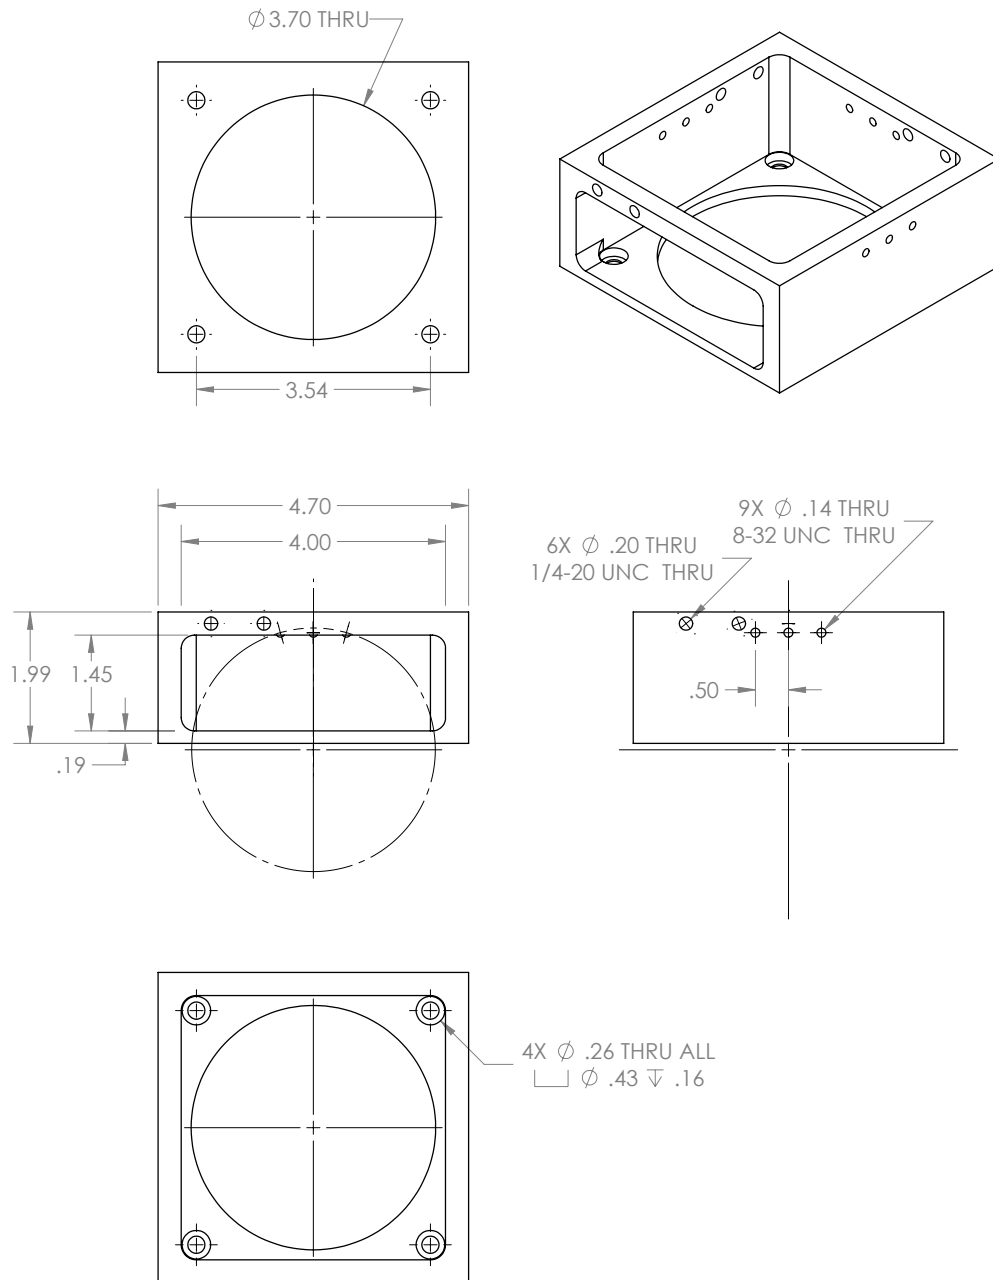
Mechanical drawings of the upper objective mirror mount holder. The curved edges are solely to facilitate machining. All dimensions are given in inches.
